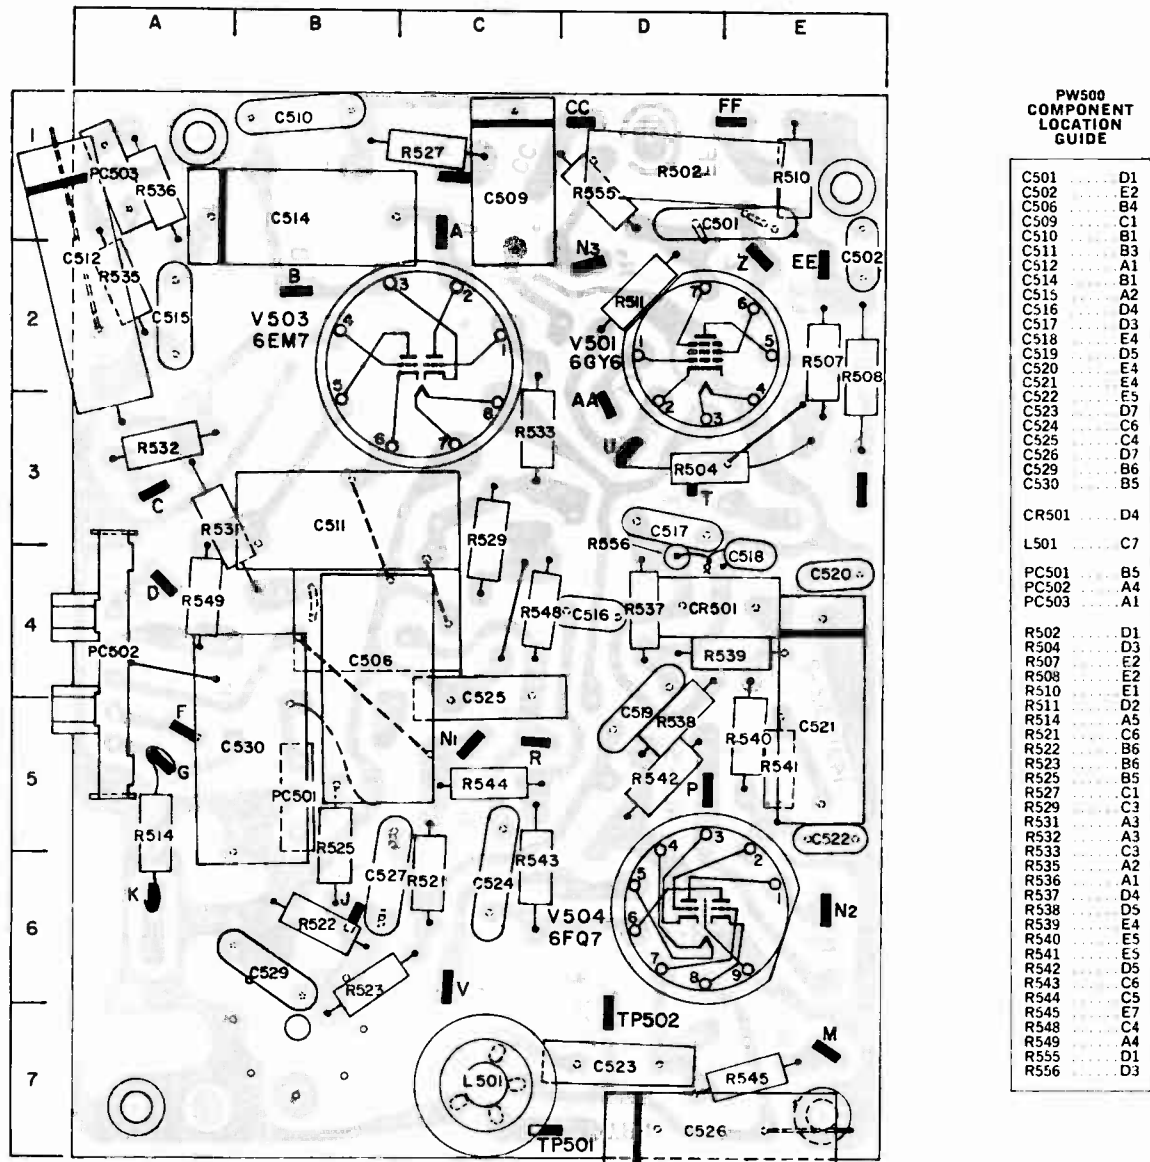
PW500 Sealed Circuit Deflection Assembly Composite Diagram
